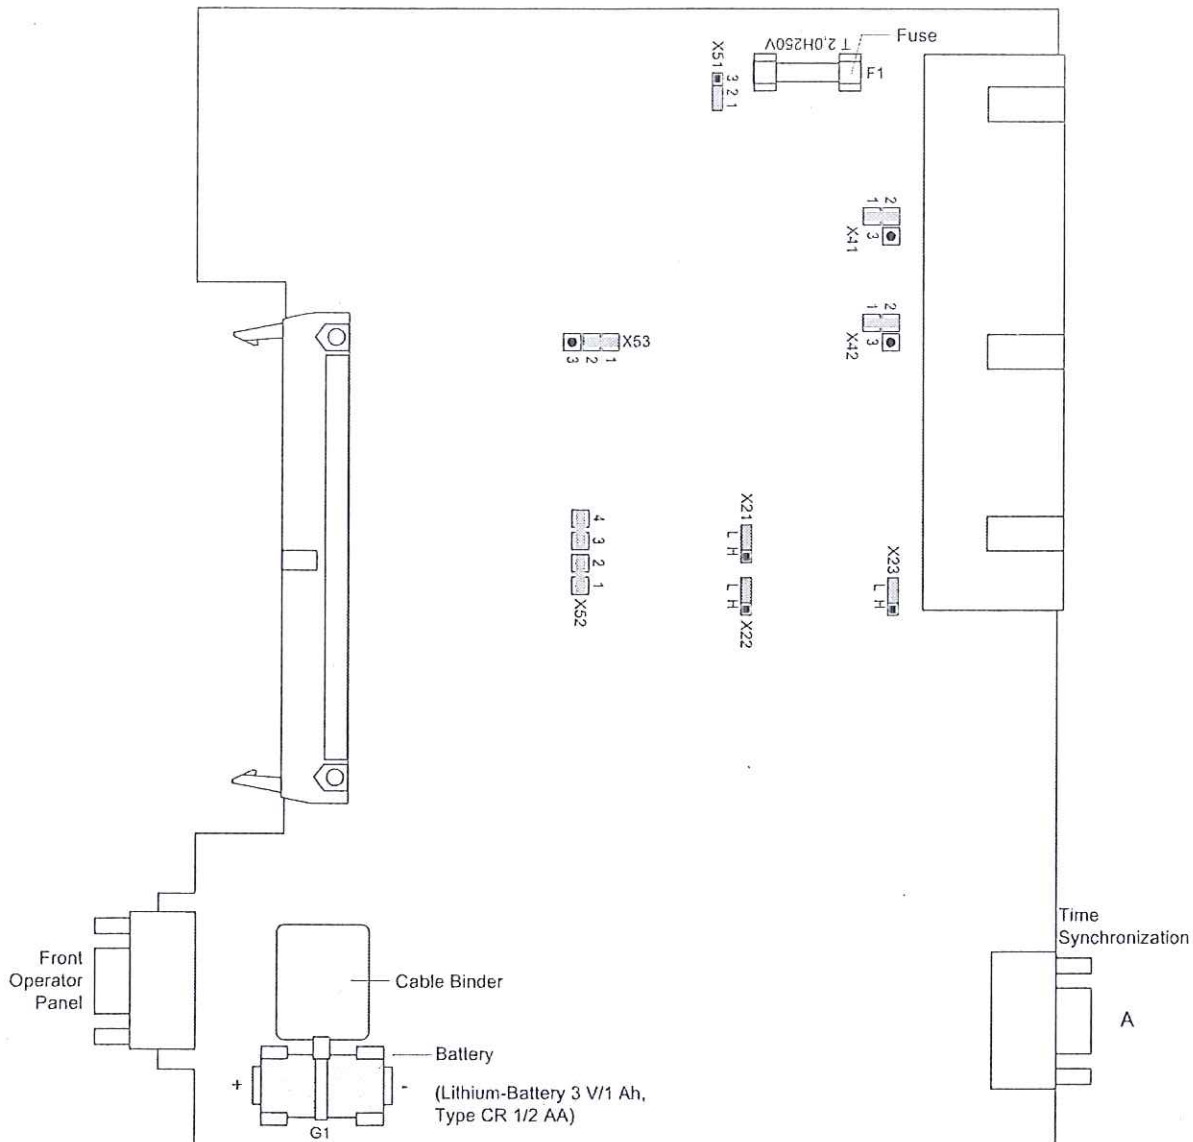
Processor printed circuit board A-CPU for devices .../EE and higher with jumpers settings required for the board configuration
